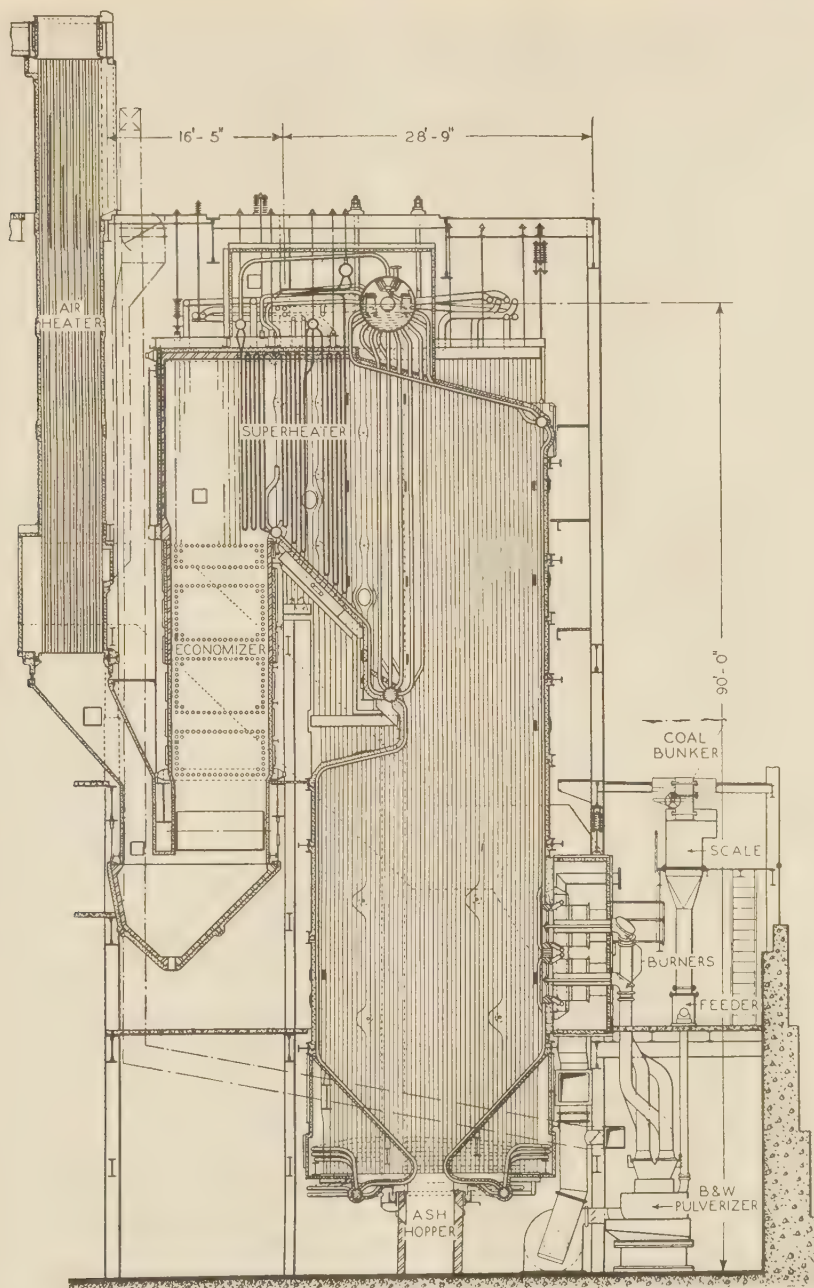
CROSS SECTION THROUGH BOILER OF 900-PSI CLASS
